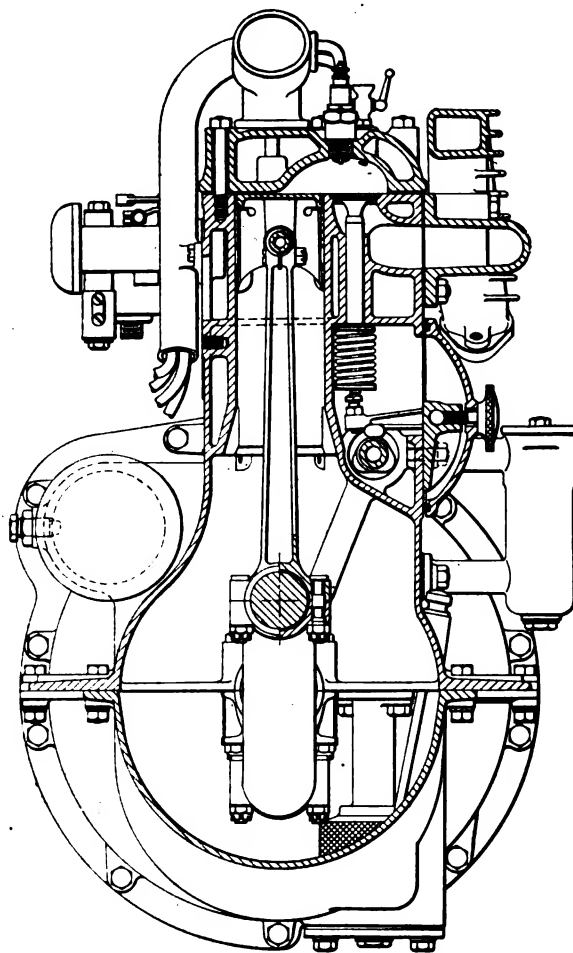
ELEVATION, PARTLY IN SECTION, OF A 11.9-HP. ENGINE
